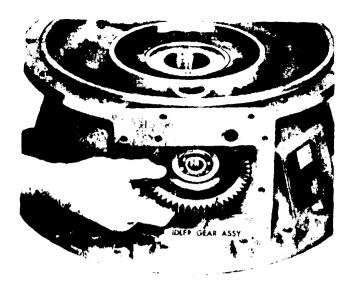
C-22. Removing (or Installing) Oil Pump Idler Gear
